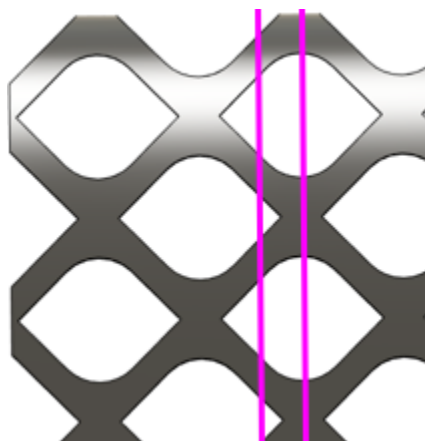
VERTICAL VIEW OF WD2 SUBSECTION, CROSS SECTIONS SHOWN WITH PINK VERTICAL LINES.
